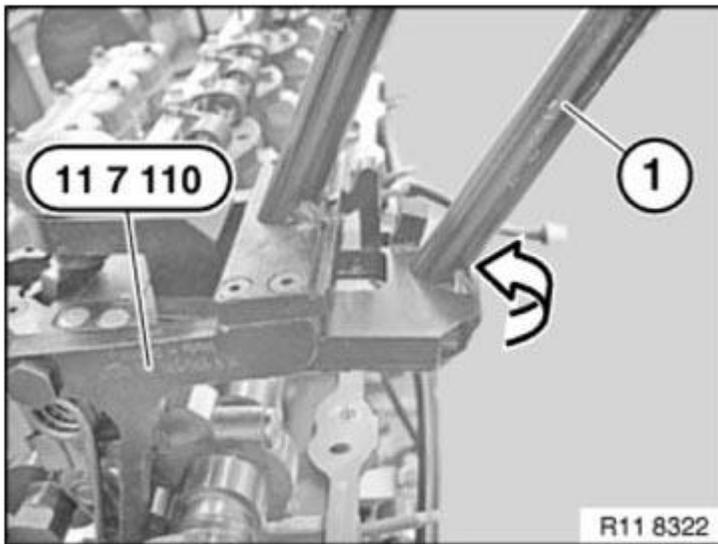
Preloading Return Spring On Special Tool (11 7 110)
